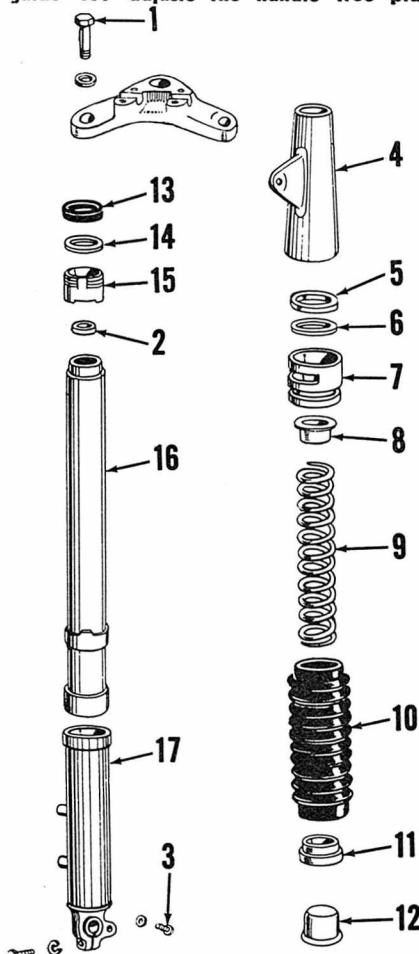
Exploded view of front suspension unit typical of type used on F1, F2 and early F3 models.
